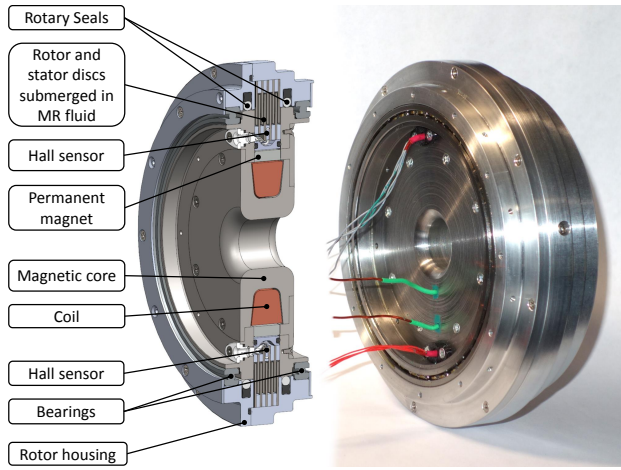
Section view of the 5<sup>th</sup> joint MR clutch.
